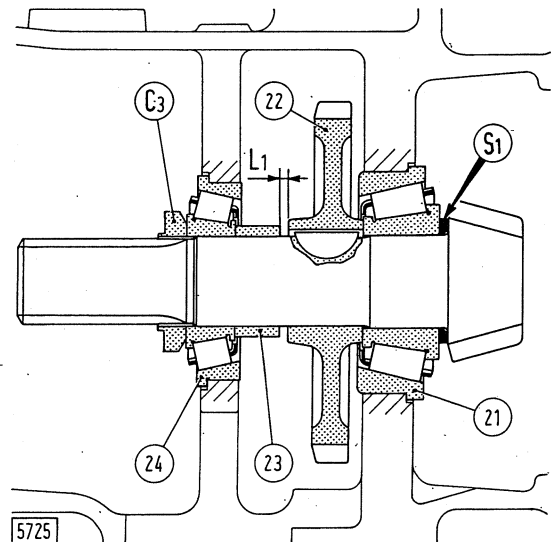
Adjusting the bevel gear pinion shaft tapered roller bearings.
